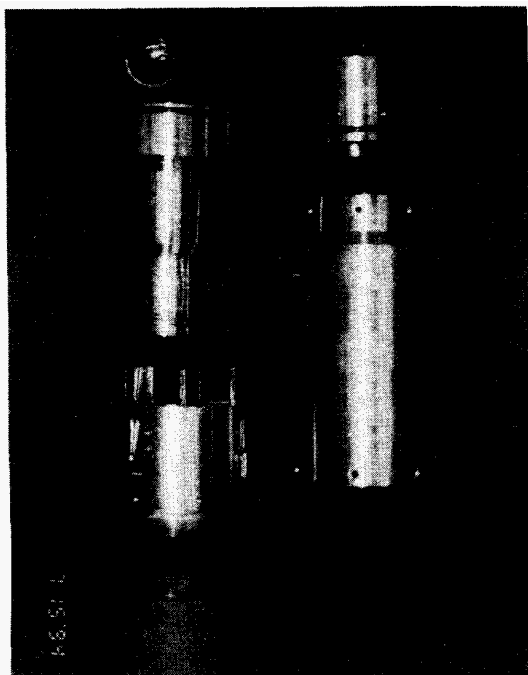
Drillstring coupler in exploded view. Counterclockwise from top: Brass ball, piston, grapple assembly, top of packer assembly, outer housing, drill pipe connector.
